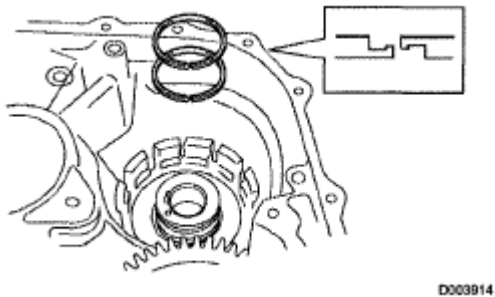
Installing Oil Seal Rings To Transaxle Case
